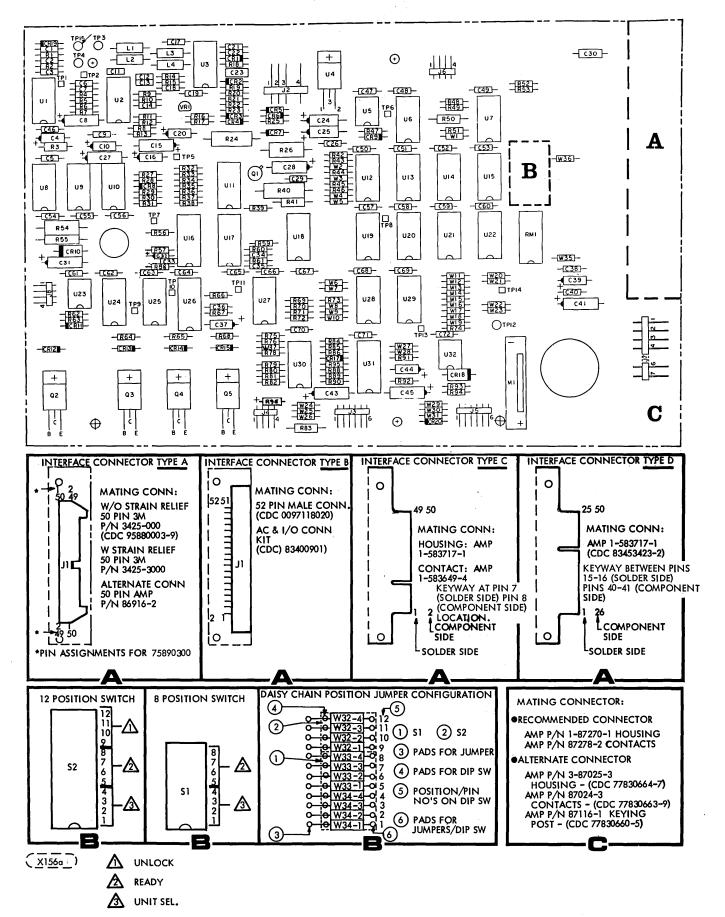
Assembly and Parts List (Sheet 1 of 5)
